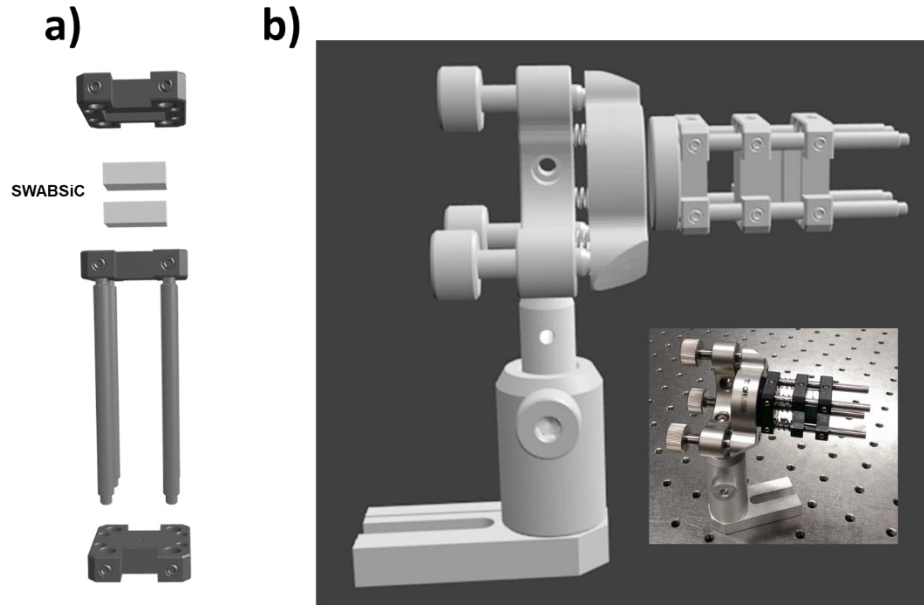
SWABSiC sample assembly. a) Schematic of sample holder. b) Schematic of sample assembly. Inset: photo of fully-assembled parts.
